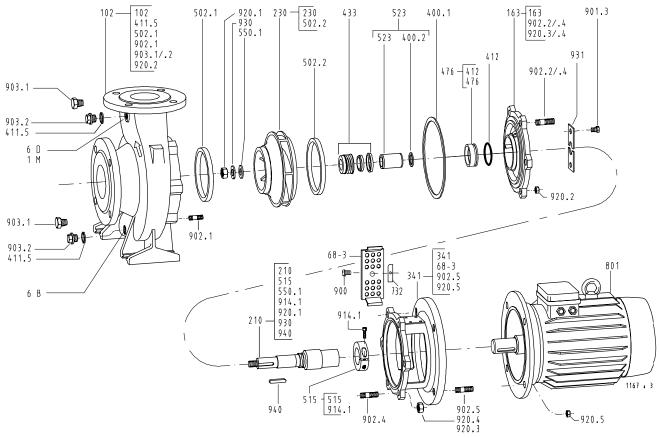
Standardised mechanical seal and bolted discharge cover Table 30: List of components
